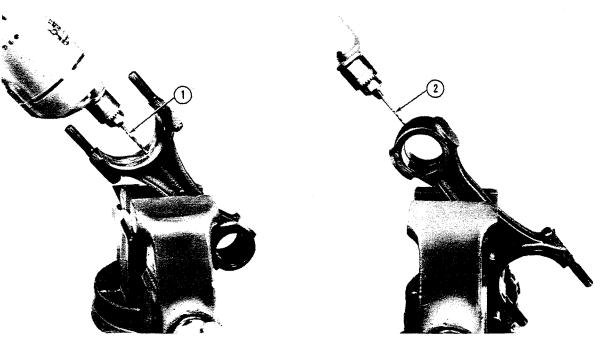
Drilling Connecting Rod Bushings—TW20 and 30 1. 5/32" Drill 2. 3/64" Drill
